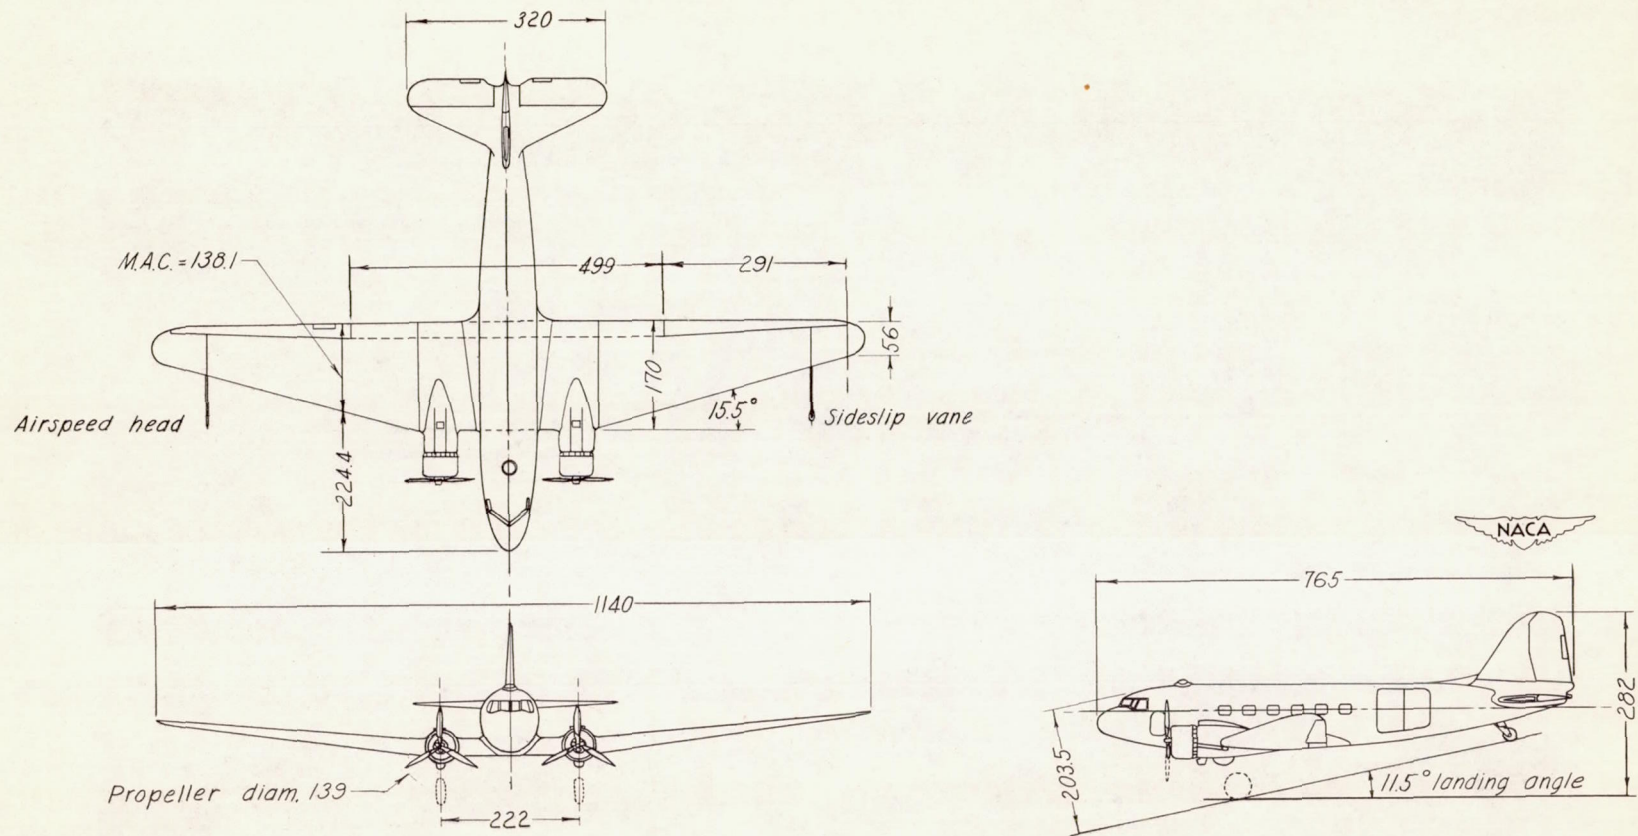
Three-view drawing of a Douglas DC-3 model C-47B. All dimensions in inches.
